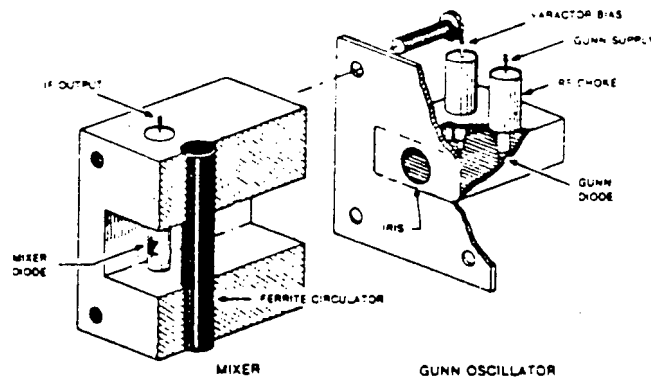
Assembly drawing of Gunnplexor™ module.
